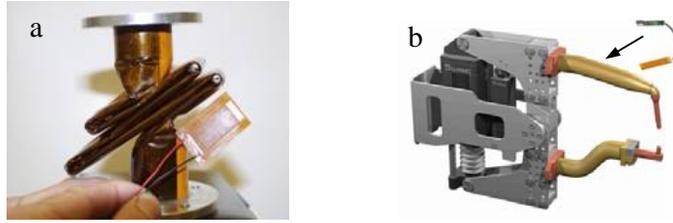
(a) RIGIX experimental inflatable tube with MFC vibration suppressor, (b) SWAC GmbH robotic welding head with MFC sensor pack.
